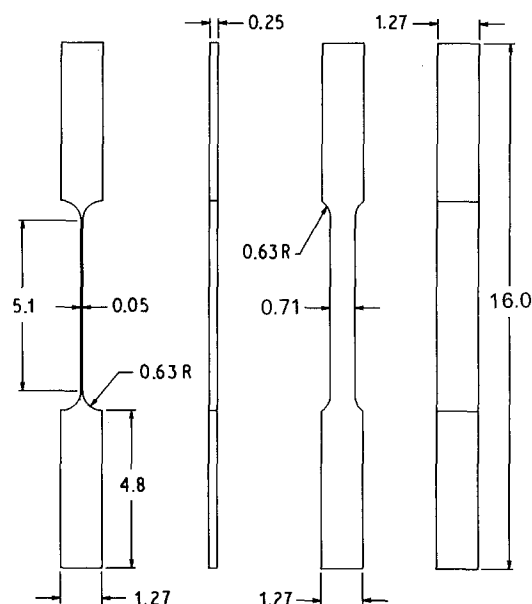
Tensile specimen shape and dimensions (cm) of smallest and largest specimens.
